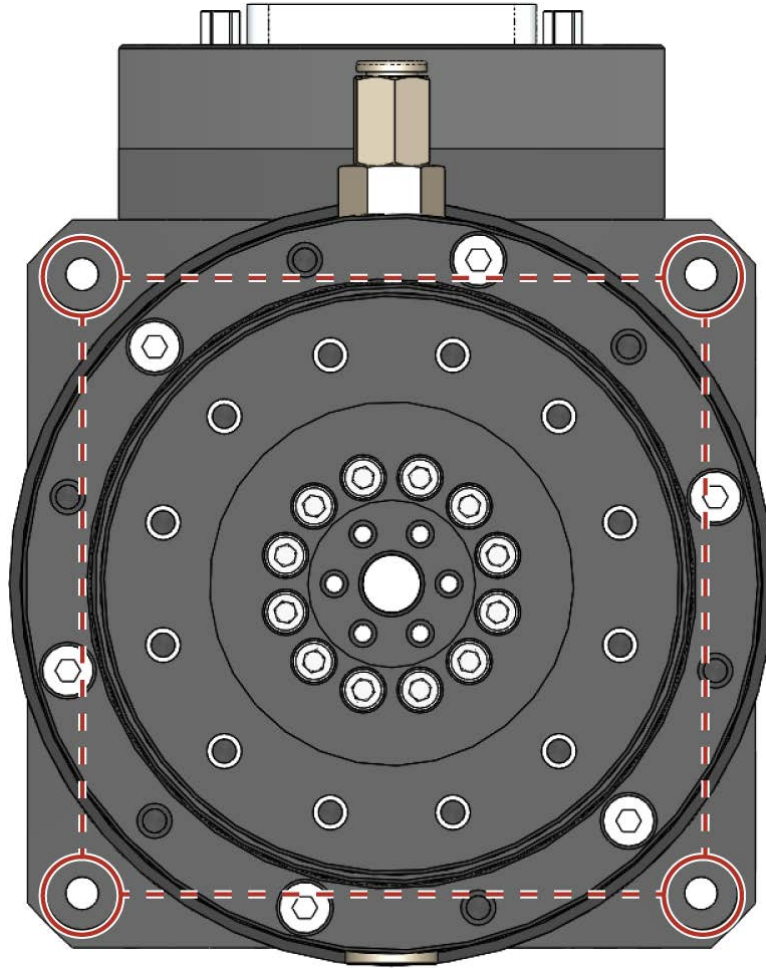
Top View of an ABRX250 Stage Showing Mounting Holes
